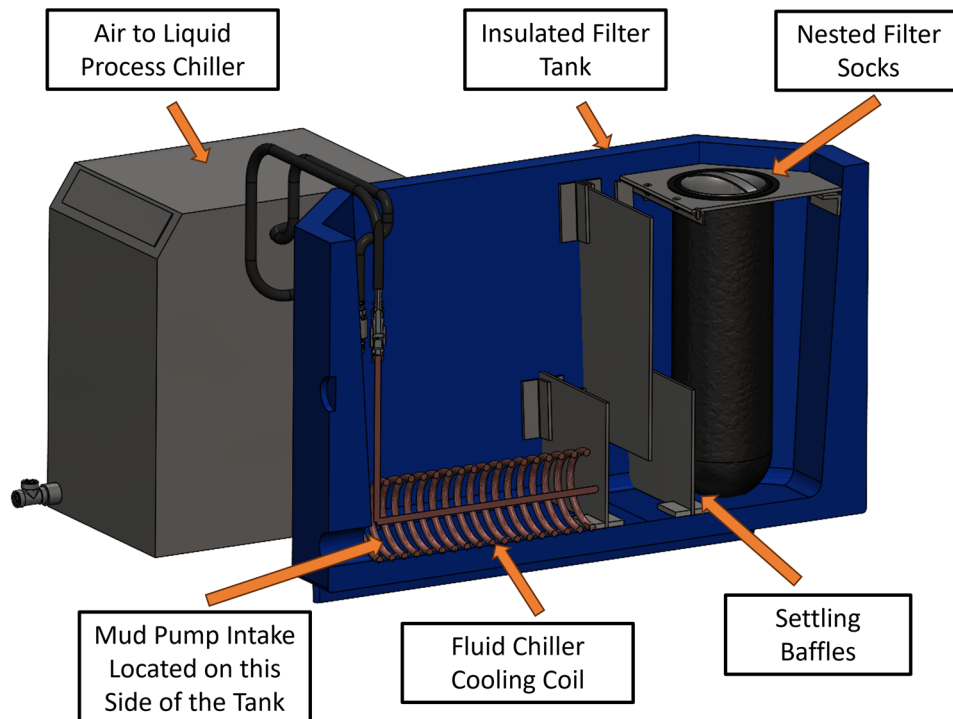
Section View of WDS Filtration Tank and Fluid Chiller Setup
